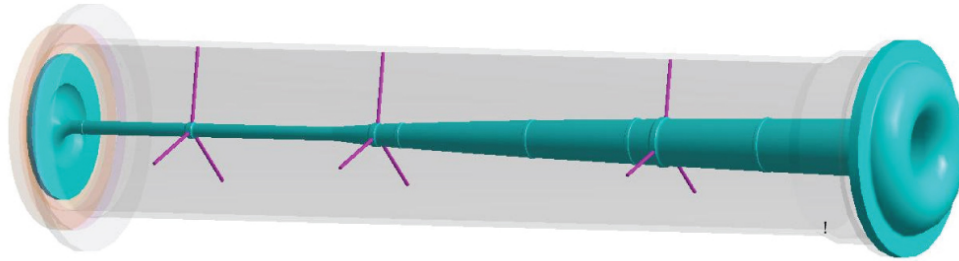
Additional support and stability for the thin inner conductor are provided by welded struts or "spider" (web) supports (thin purple pieces).
